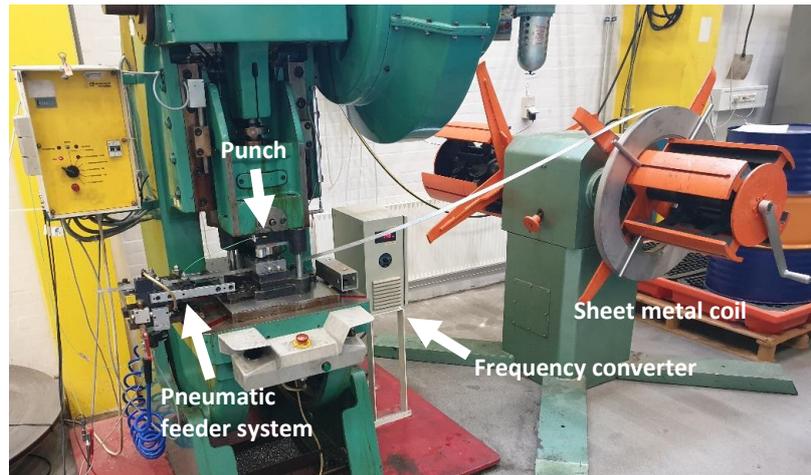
Eccentric press equipped with punching tool, feeder system and a load cell for measurement of the punch force and the backstroke force.
